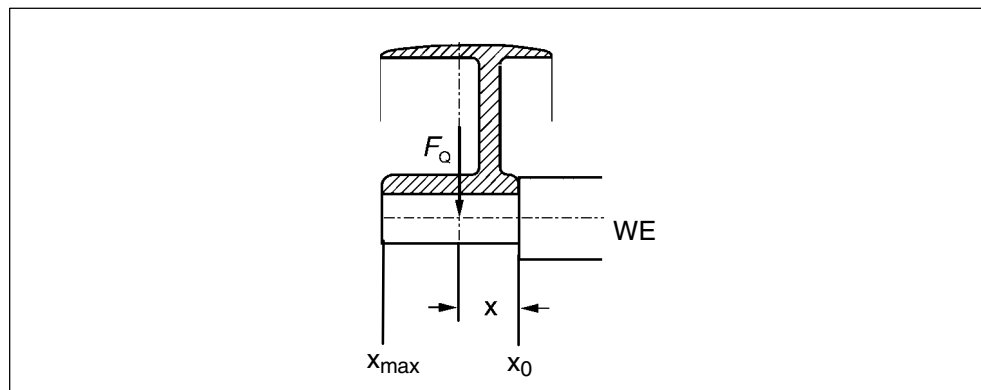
Dimension X (free shaft end) and X_0 (shaft shoulder)
